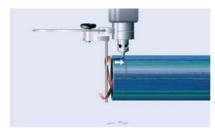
Removal of the protective coating with the egeplast coating cutter
